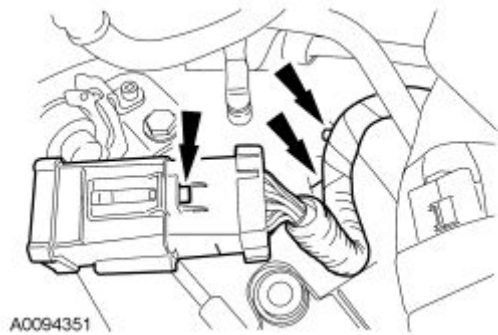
Locating 16-Pin Electrical Connector & Wiring Retainers
